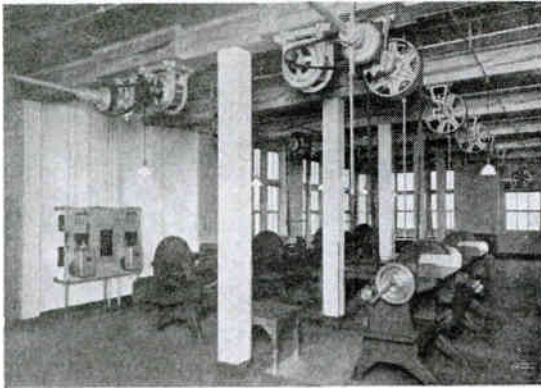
Machines for Slicing Bacon and Dried Beef. Operated from Line Shaft
